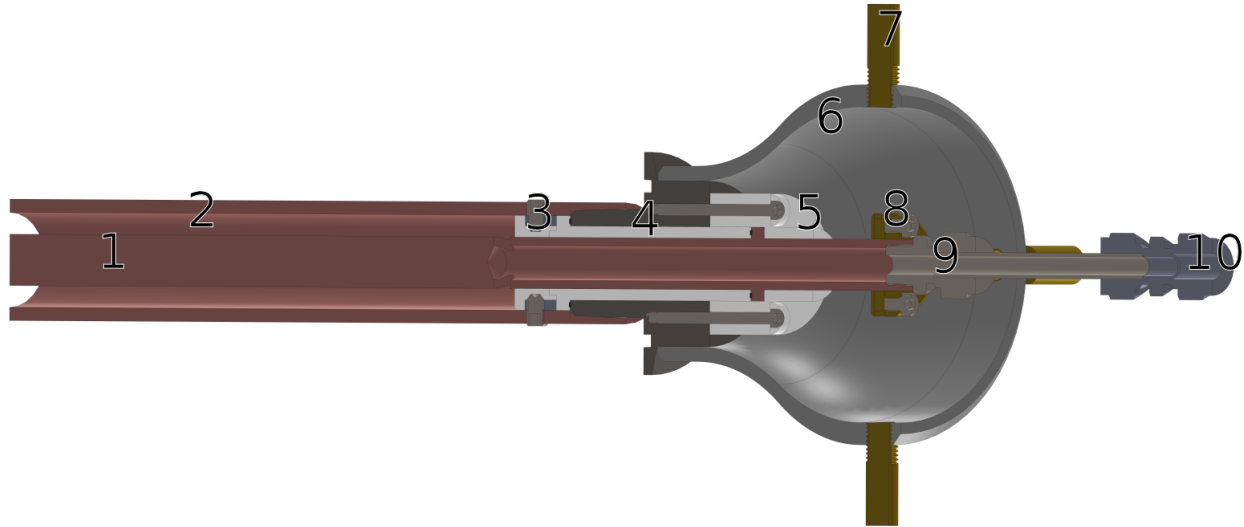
Cutaway view of the coaxial gun showing 1) the inner electrode, 2) outer electrode, 3) plasma-facing insulator, 4) internal insulator, 5) external insulator, 6) outer power feedthrough, 7) coaxial cable outer connectors, 8) coaxial cable inner connector and feedthrough collar, 9) gas puff-valve standoff, 10) gas puff-valve connection point.
